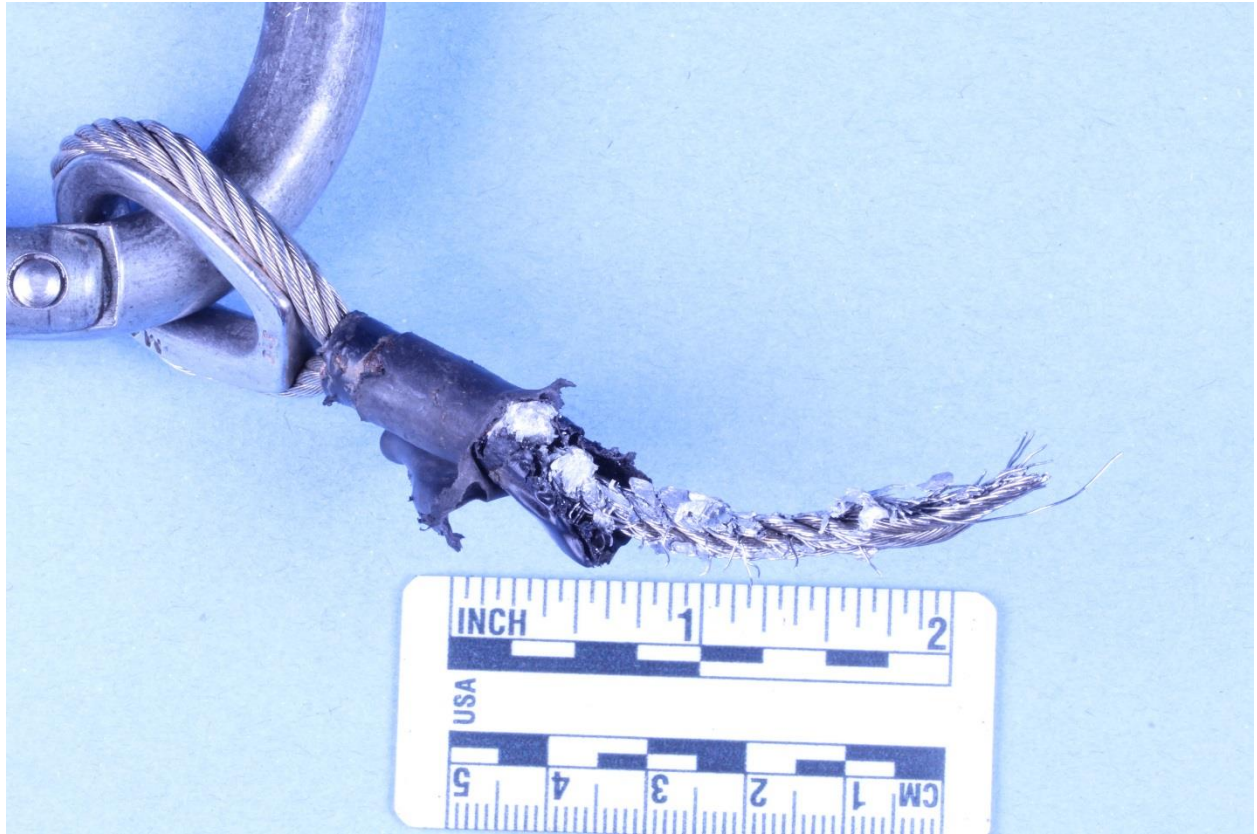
Load cable exhibiting overload failure and abrasion (Burner Support Frame 3)
